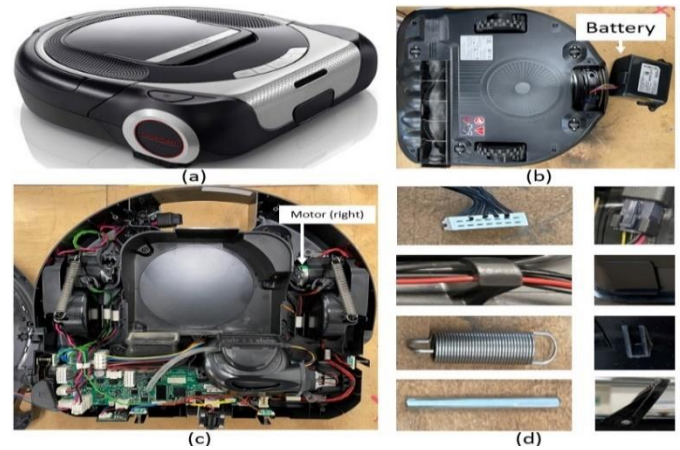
(a) Bosch Roxxter robotic vacuum cleaner ; Critical components - (b) Battery (c) Motor ; (d) Connectors (clockwise from top left - PCB connector, cable plug, Snap fit-1&2, hinge, metal pin, spring & hook) learning algorithms, and additional measures for ensuring human safety are not being considered.
